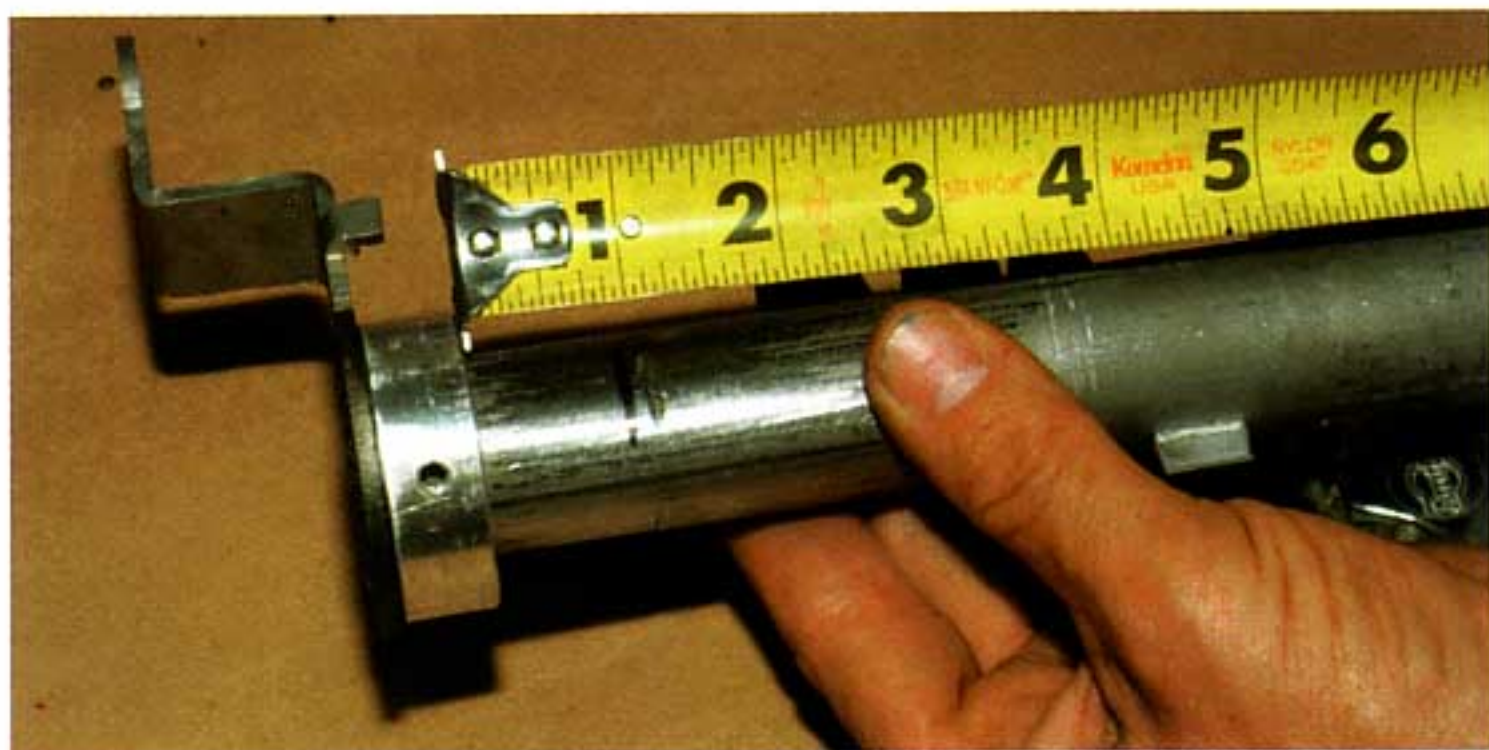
Slide the aluminum bushing all the way down the shift tube. Make certain it will spin freely and not bind on the tube. Measure 15/16" up from the top side of the bushing and mark the tube.
